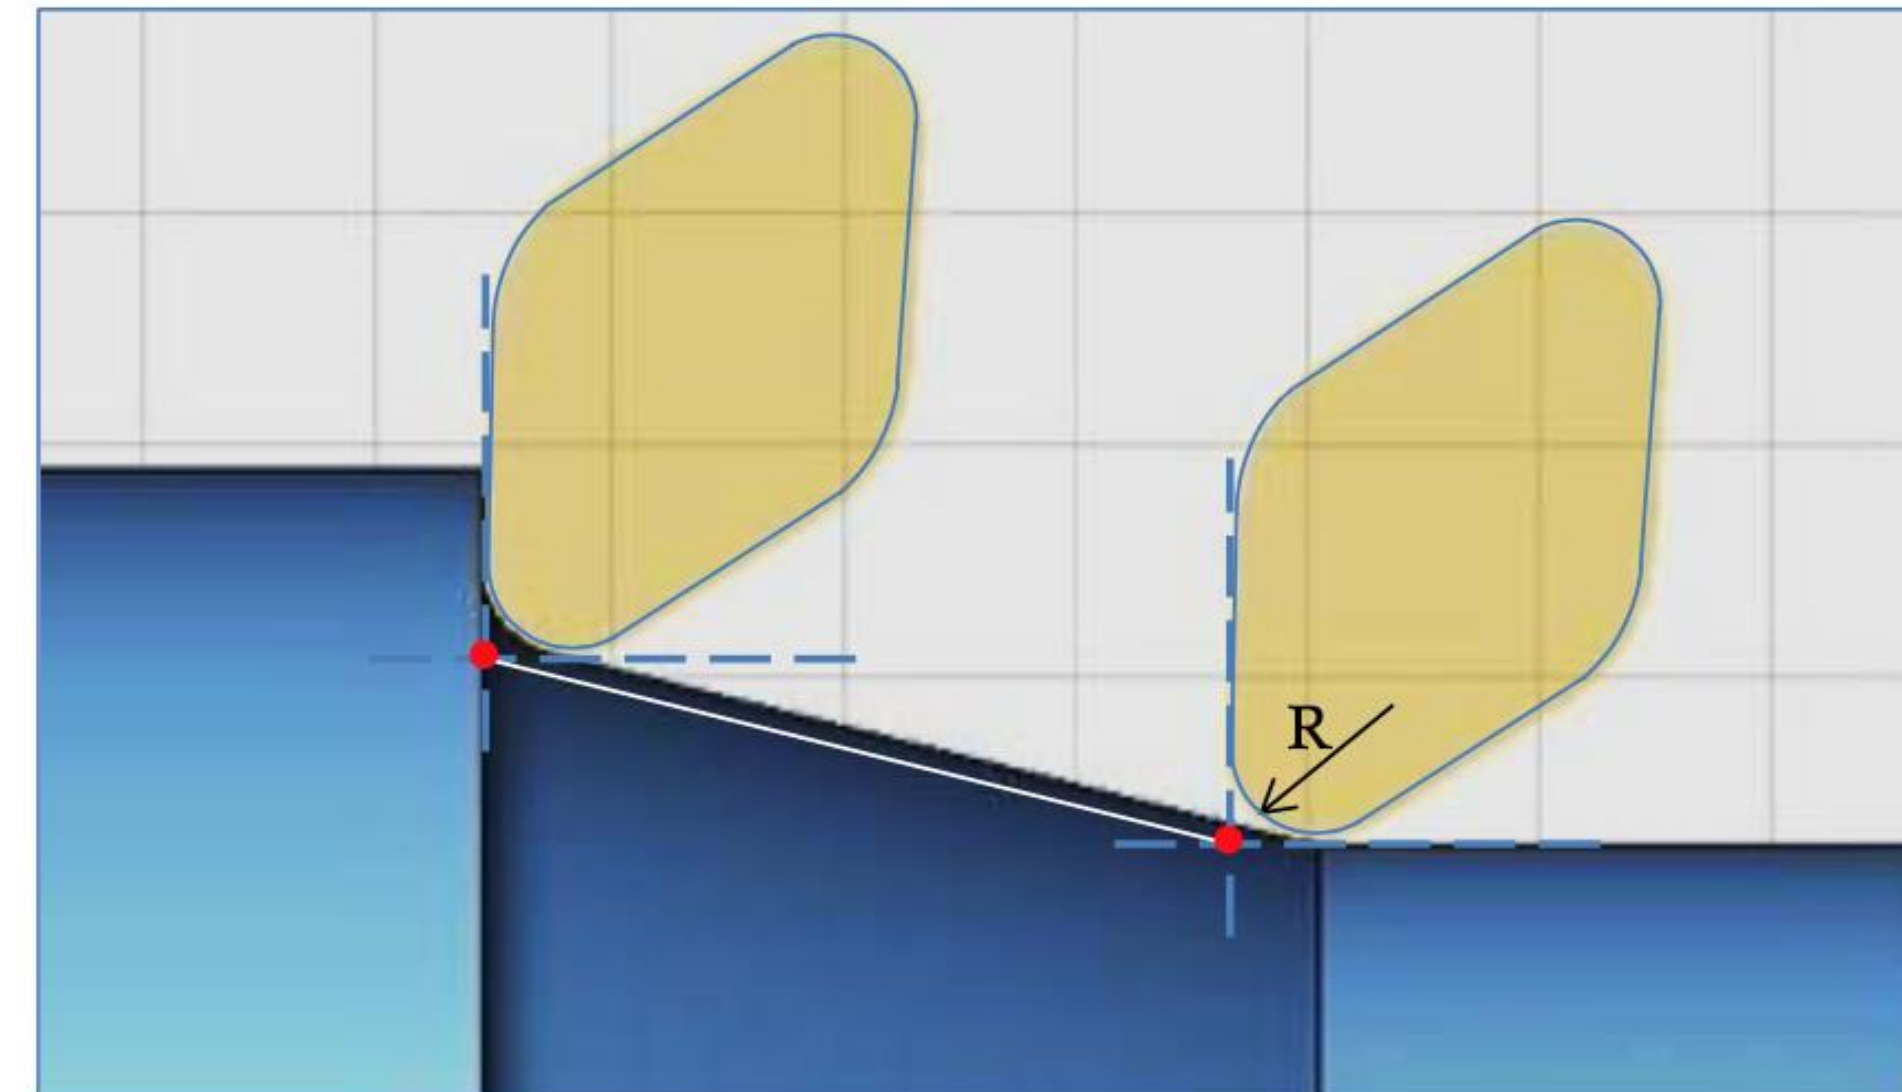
Dimensional error caused by the insert radius during the execution of conical turnings
